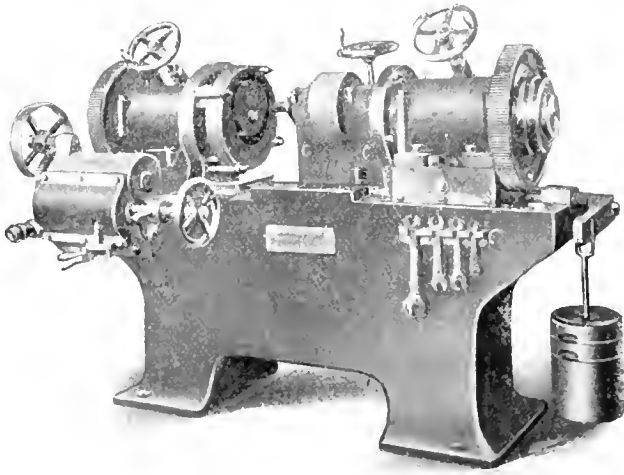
The Manville Machine for cutting Plate and Face Cams.
